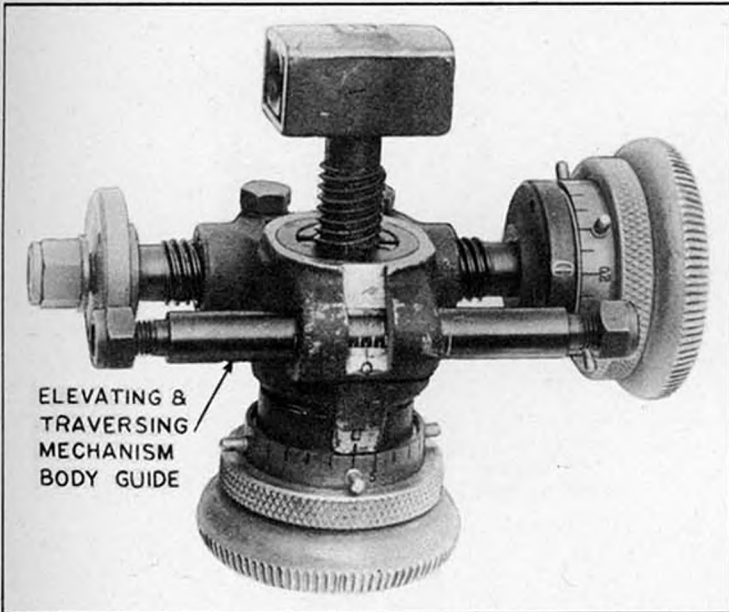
Elevating and traversing mechanism group, assembled, rear view.
